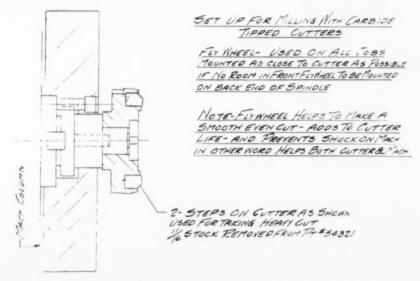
SETUP FOR MILLING WITH CARBIDE, SHOWING FLYWHEEL
